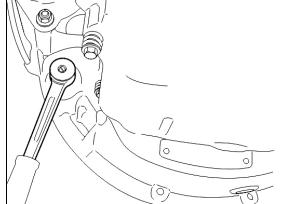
VOLVO ENGINE CRANKING POSITION
